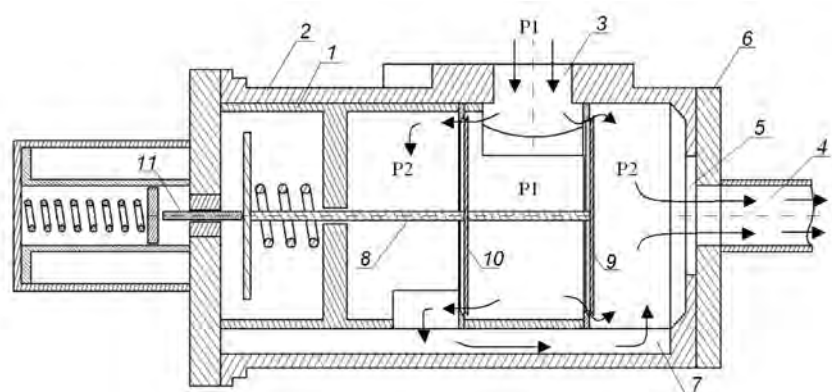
Sketch of the most important construction elements of the EGR valve. 1 – valve housing, 2 – valve body, 3 – gas inlet, 4 – gas outlet 5 – outlet end of the housing, 6 – flange with an outlet hole and exhaust pipe, 7 – bypass channel, 8 – valve stem 9 – valve head, 10 – valve head, 11 – pusher
